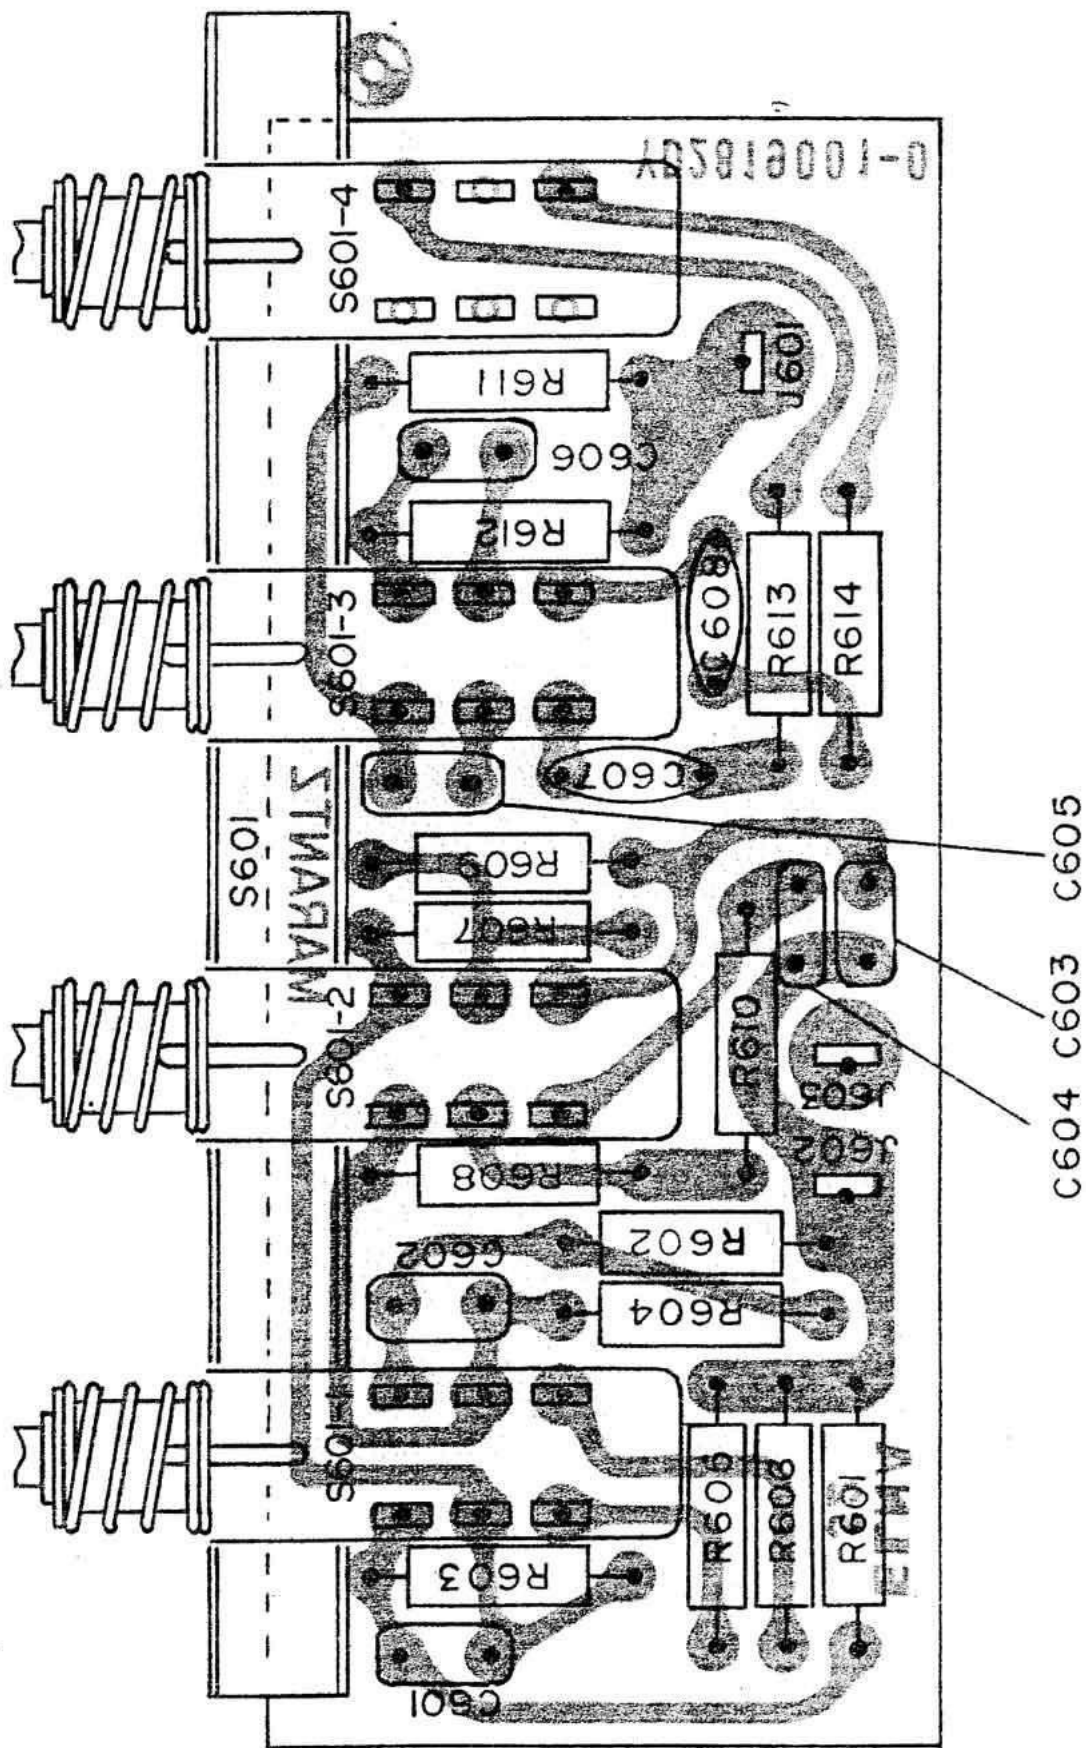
Loudness, High and Low Filter and Muting Switch Unit Assembly P600 Component Locations
